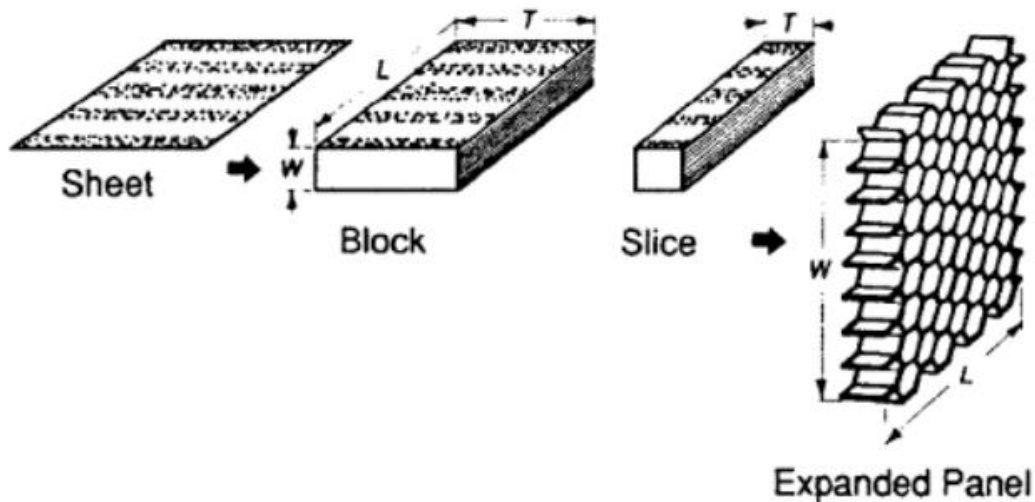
Bonding and expansion of sheet material to make a honeycomb core [28]
